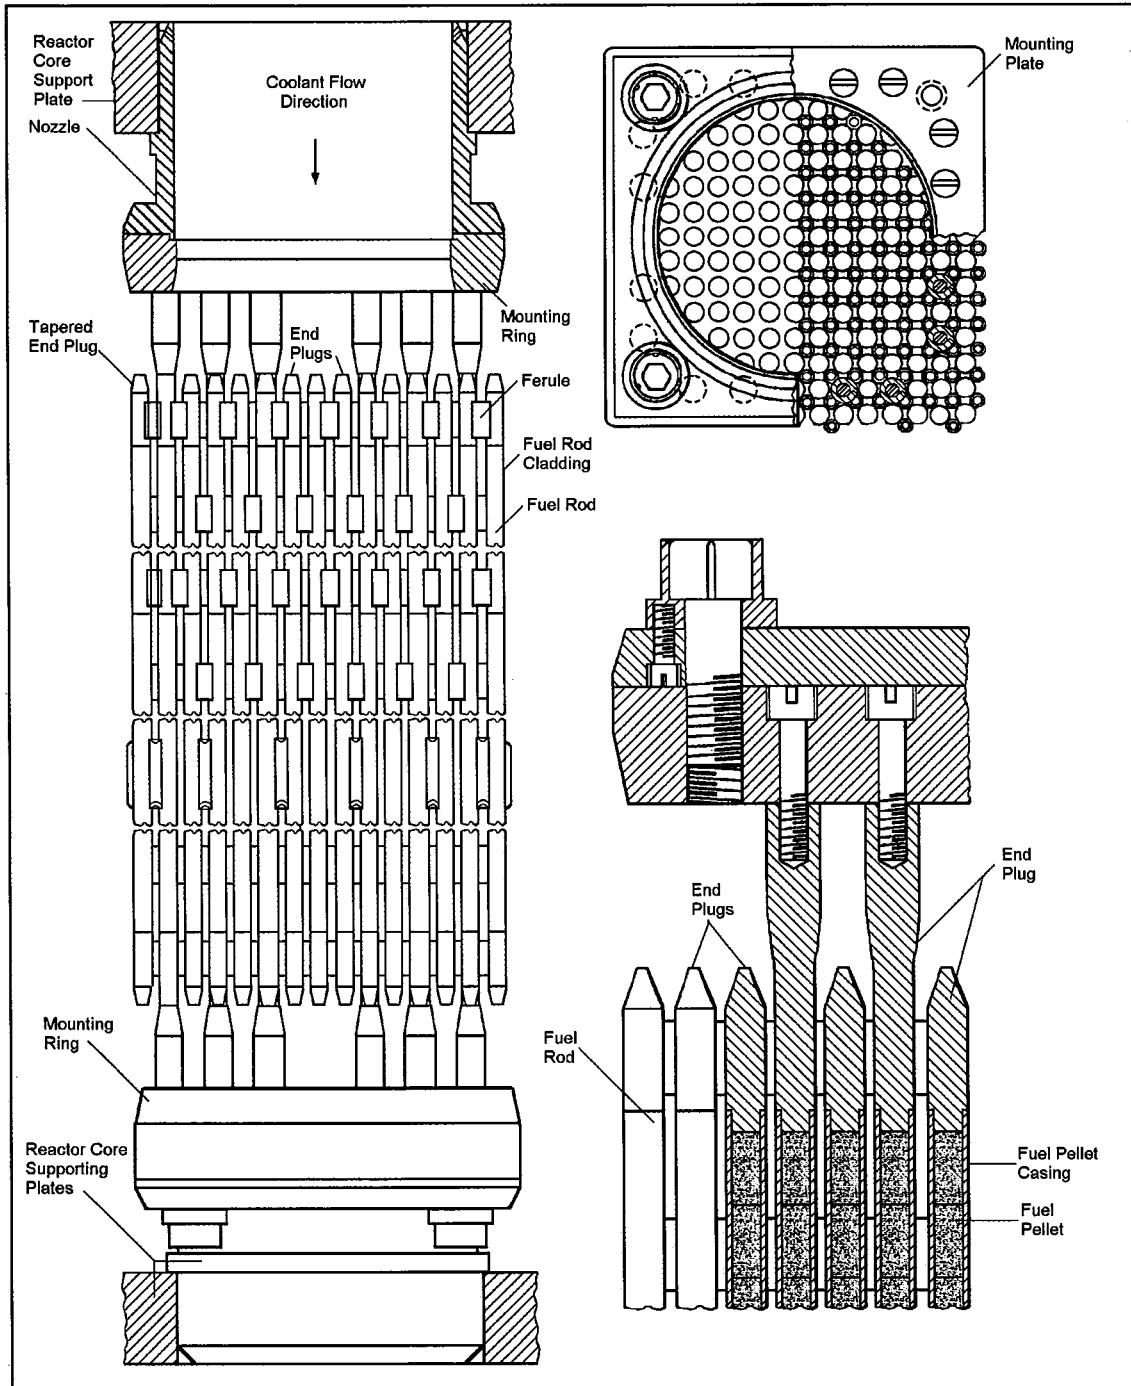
Drawing of a Reactor Fuel Assembly based on Patent #3,287.231 by E. Frisch
